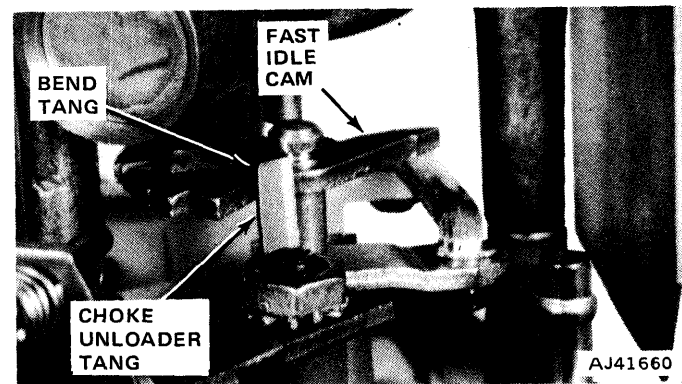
Unloader-to-Fast Idle Cam Clearance
